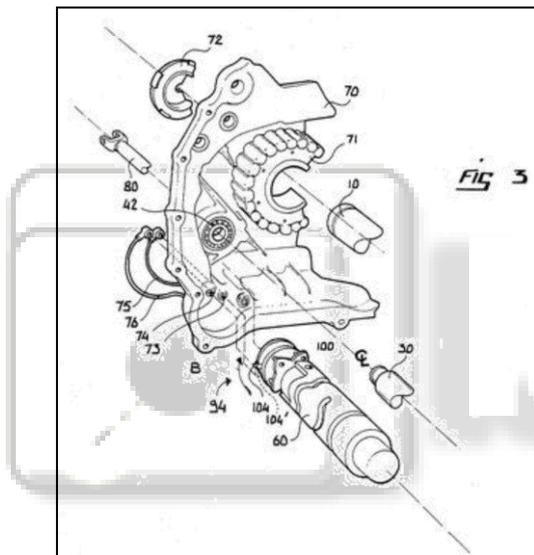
Rear engine casing showing the contact assembly, movement to signal reverse gear and back-up warning systems.
